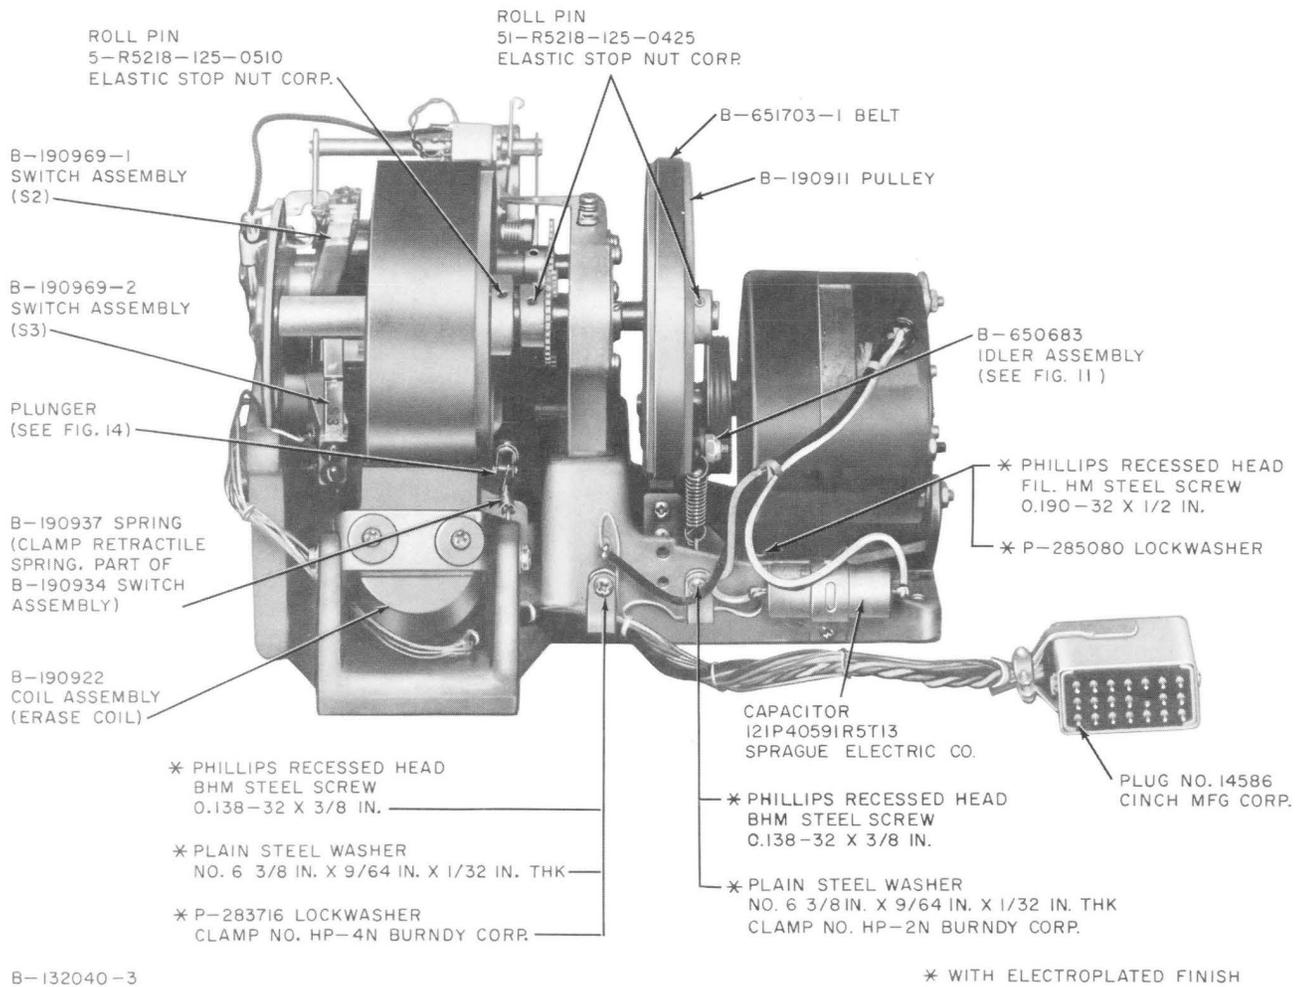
KS-16765 L3 Recorder Equipped With B-650412 Drive Assembly—Rear View
